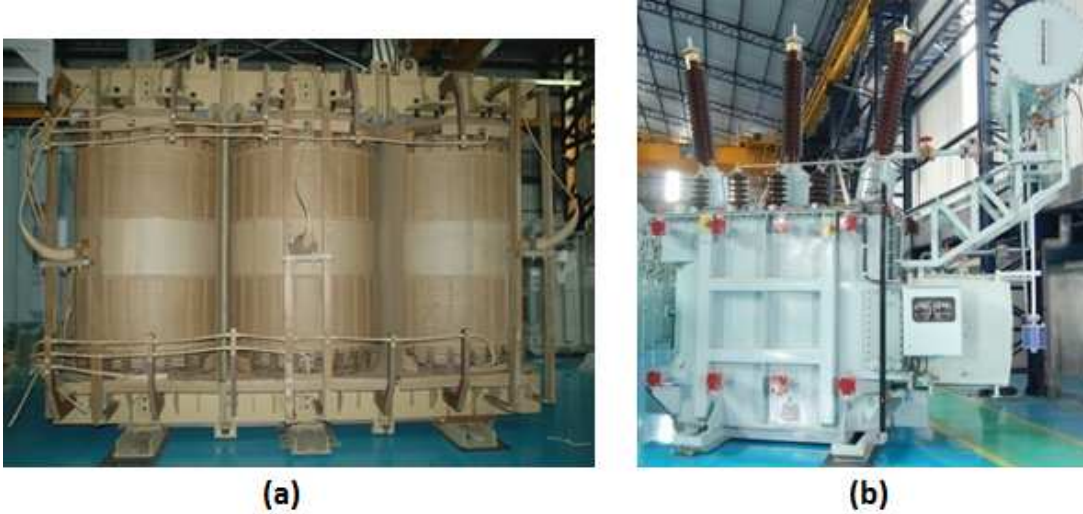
(a) Power transformer active part assembly [4]. (b) Power transformer final assembly with transformer tank and accessories [4].
